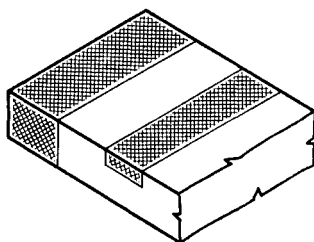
Leaving an extra waste piece when cutting a groove.
